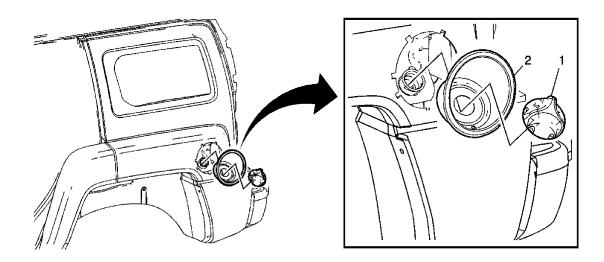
View Of Fuel Tank Filler Pipe Housing Courtesy of GENERAL MOTORS CORP.
